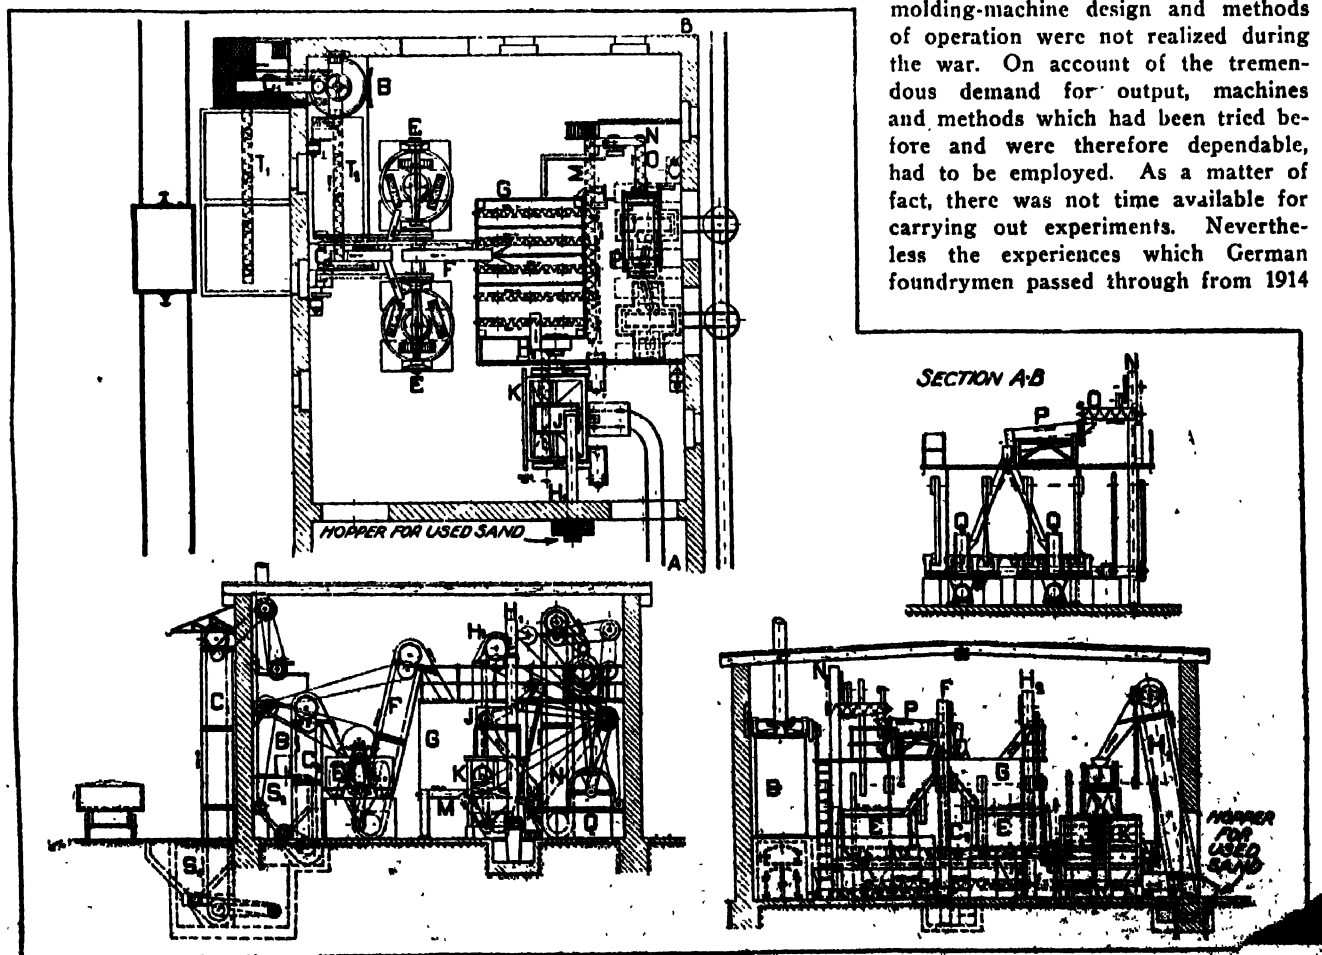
PLAN AND SECTIONAL ELEVATIONS OF MOLDING-CAND AND TEMPERING DRESSING PLANT WITH A CAPACITY OF 210 CUBIC FEET PER HOUR
